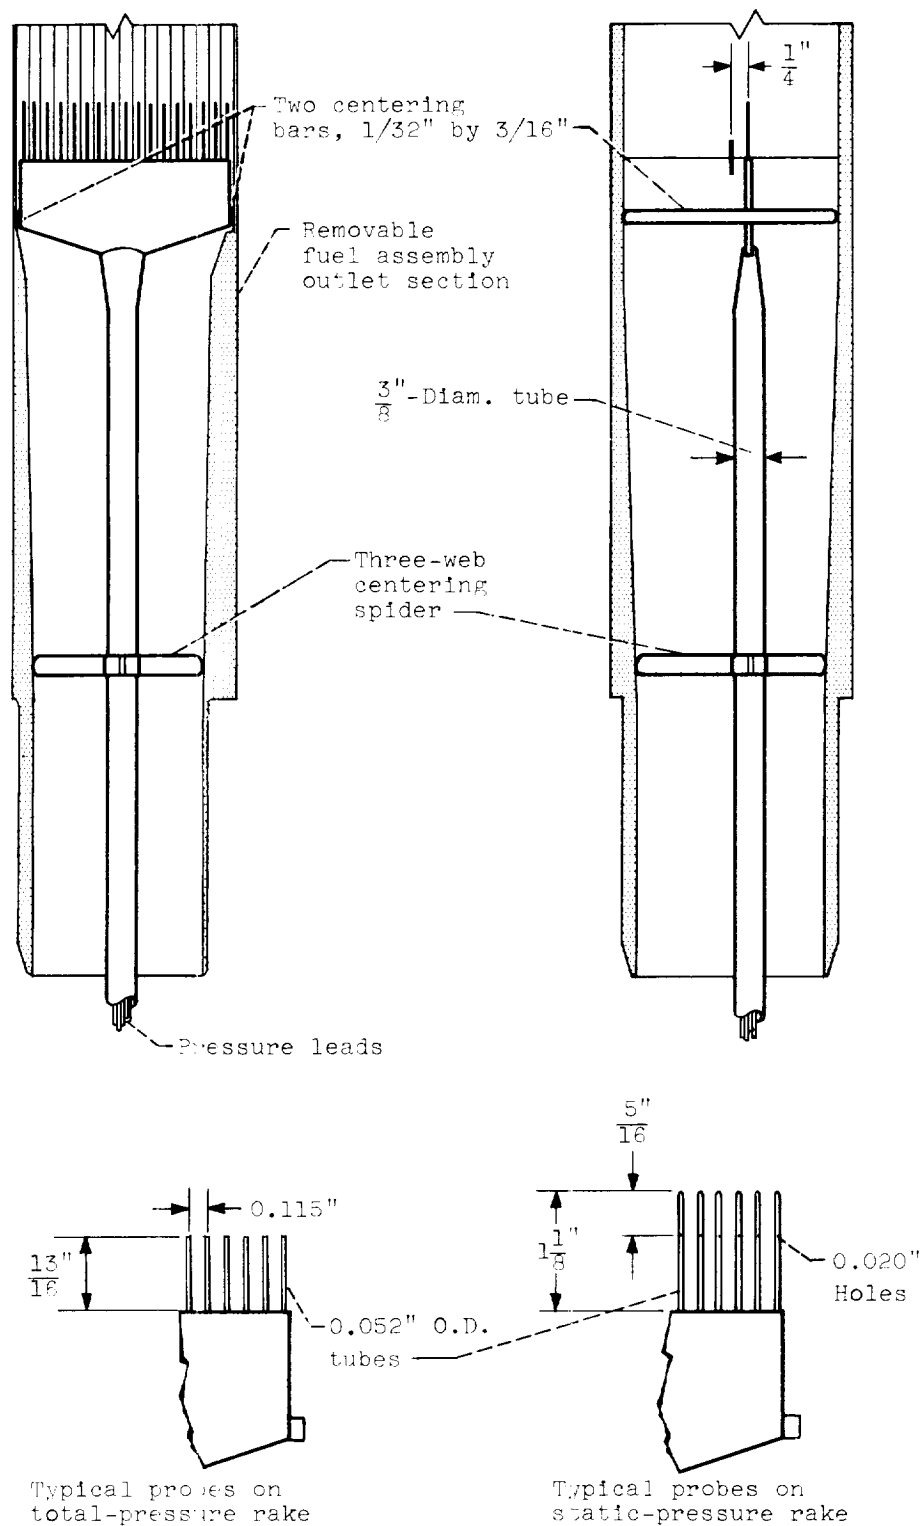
Details of removable total- and static-pressure rakes installed in position inside lower end box of fuel assemblies.
